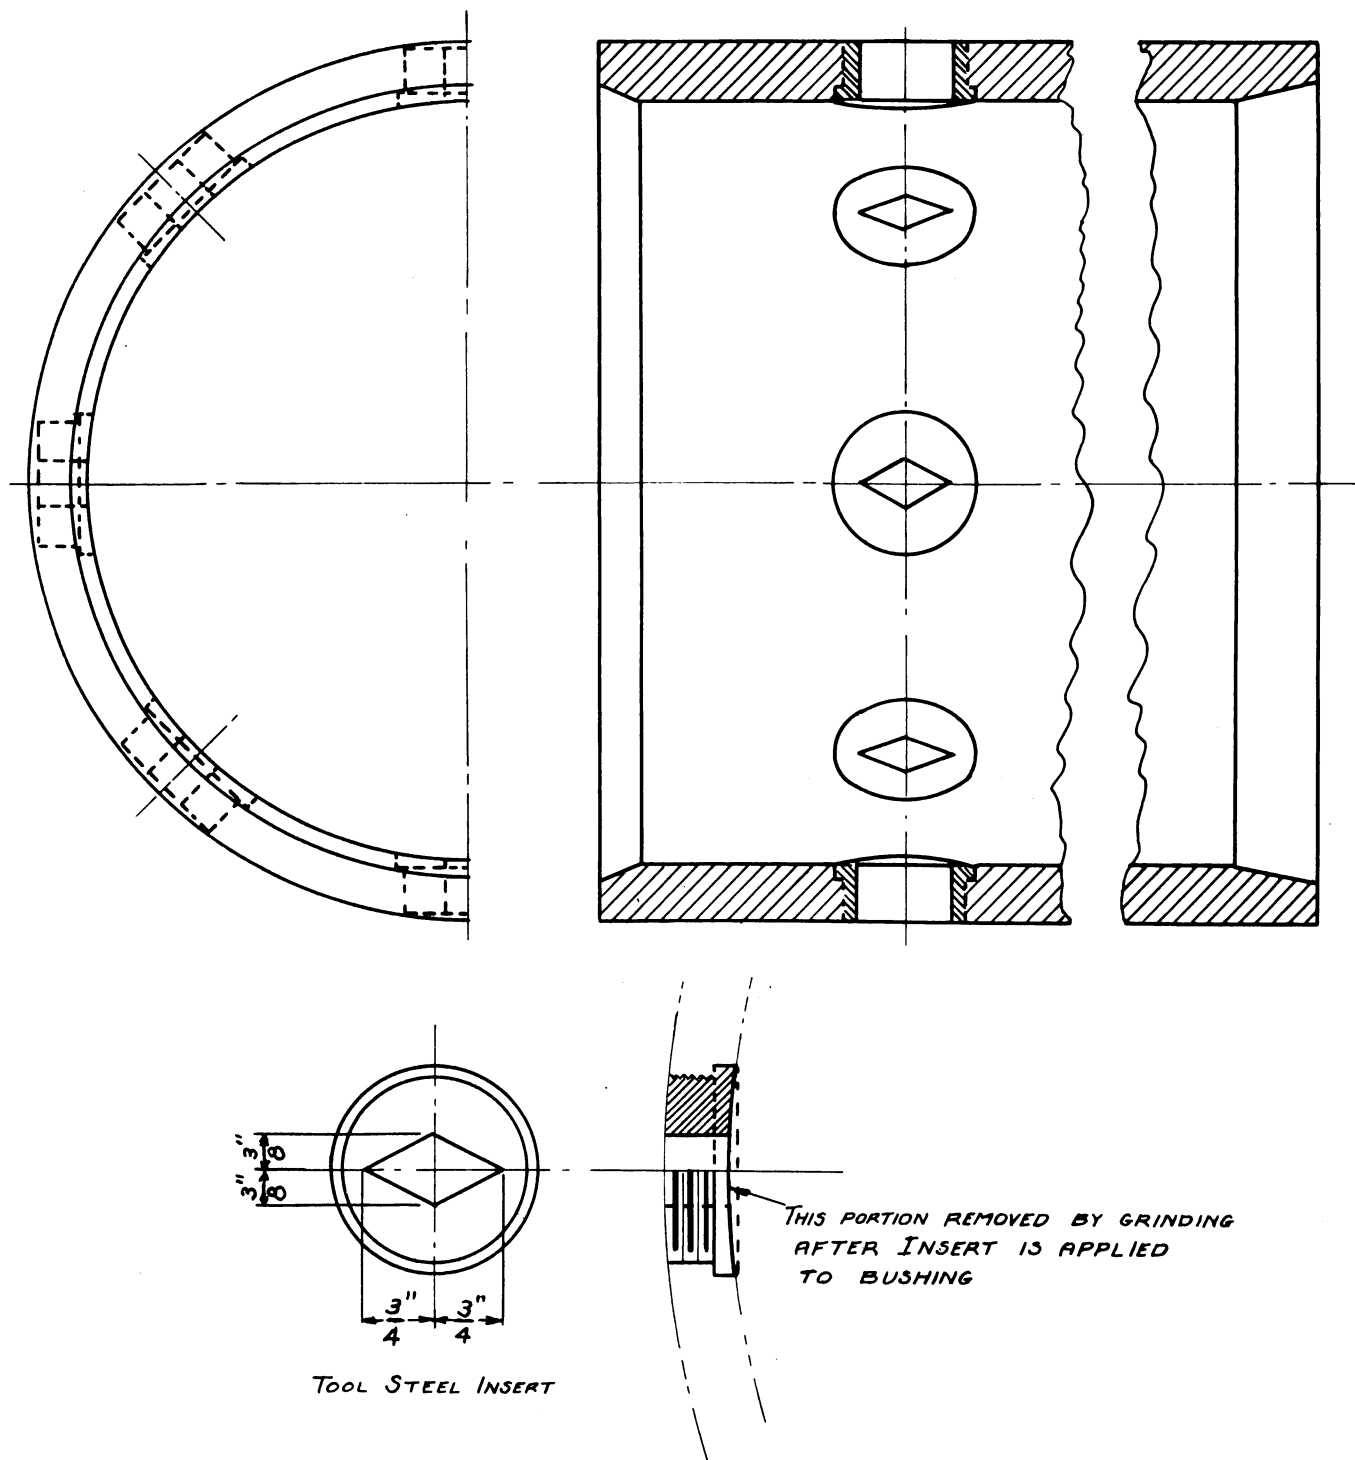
SPECIAL REAR MAIN VALVE BUSHING
